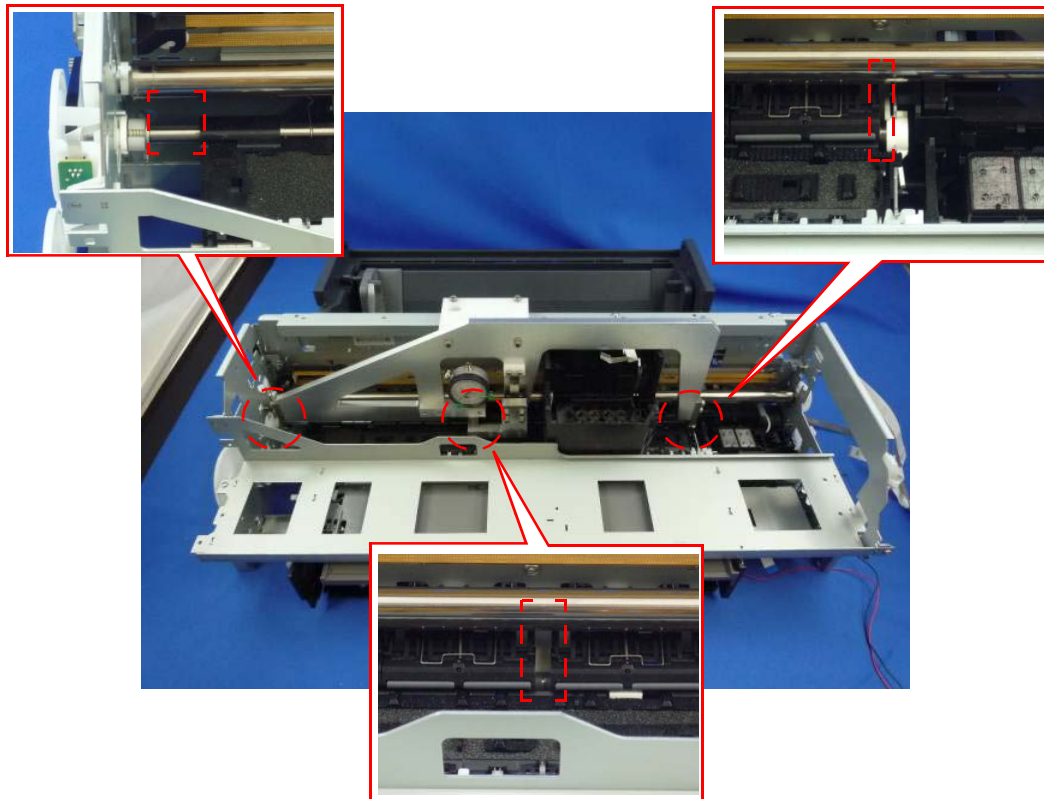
Setting the PF Roller Adjustment Jig (1)
